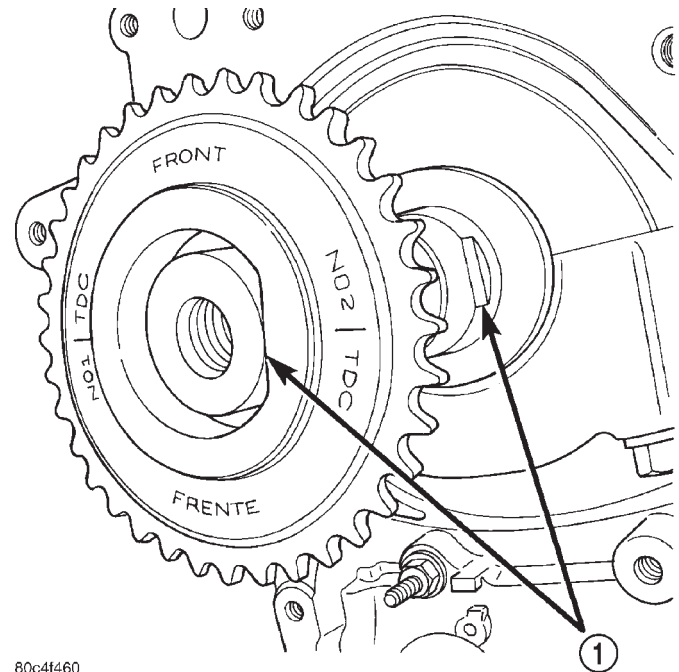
Balance Shaft Sprocket Alignment to Crankshaft
